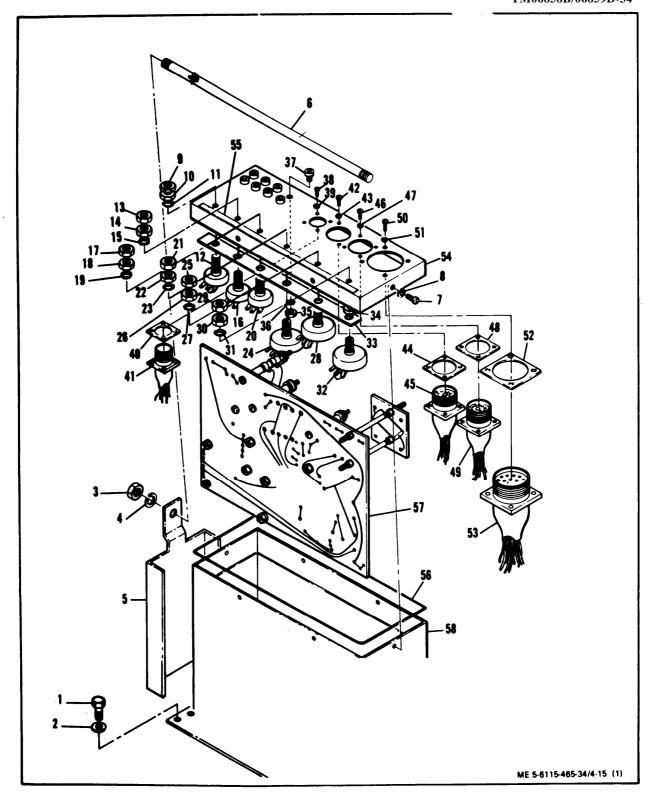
Governor Control Unit, Exploded View (Sheet 1 of 2)
